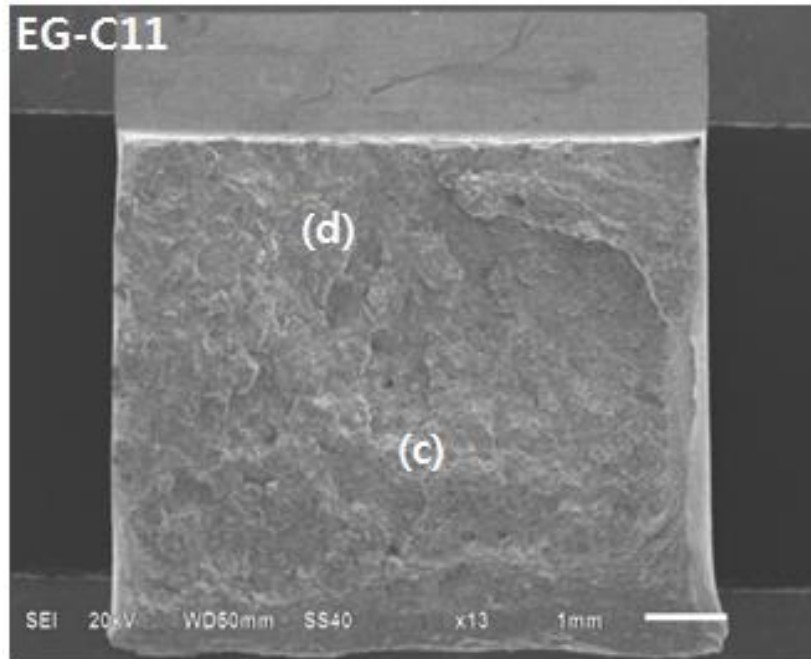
Fractographs of Charpy impact specimens fractured at 0°C for the EG-C11 fusion line +2mm specimen
